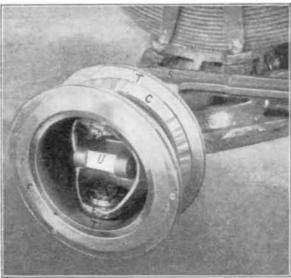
Ball Cone-Ring Forming Hub, Assembled on Axle End.
